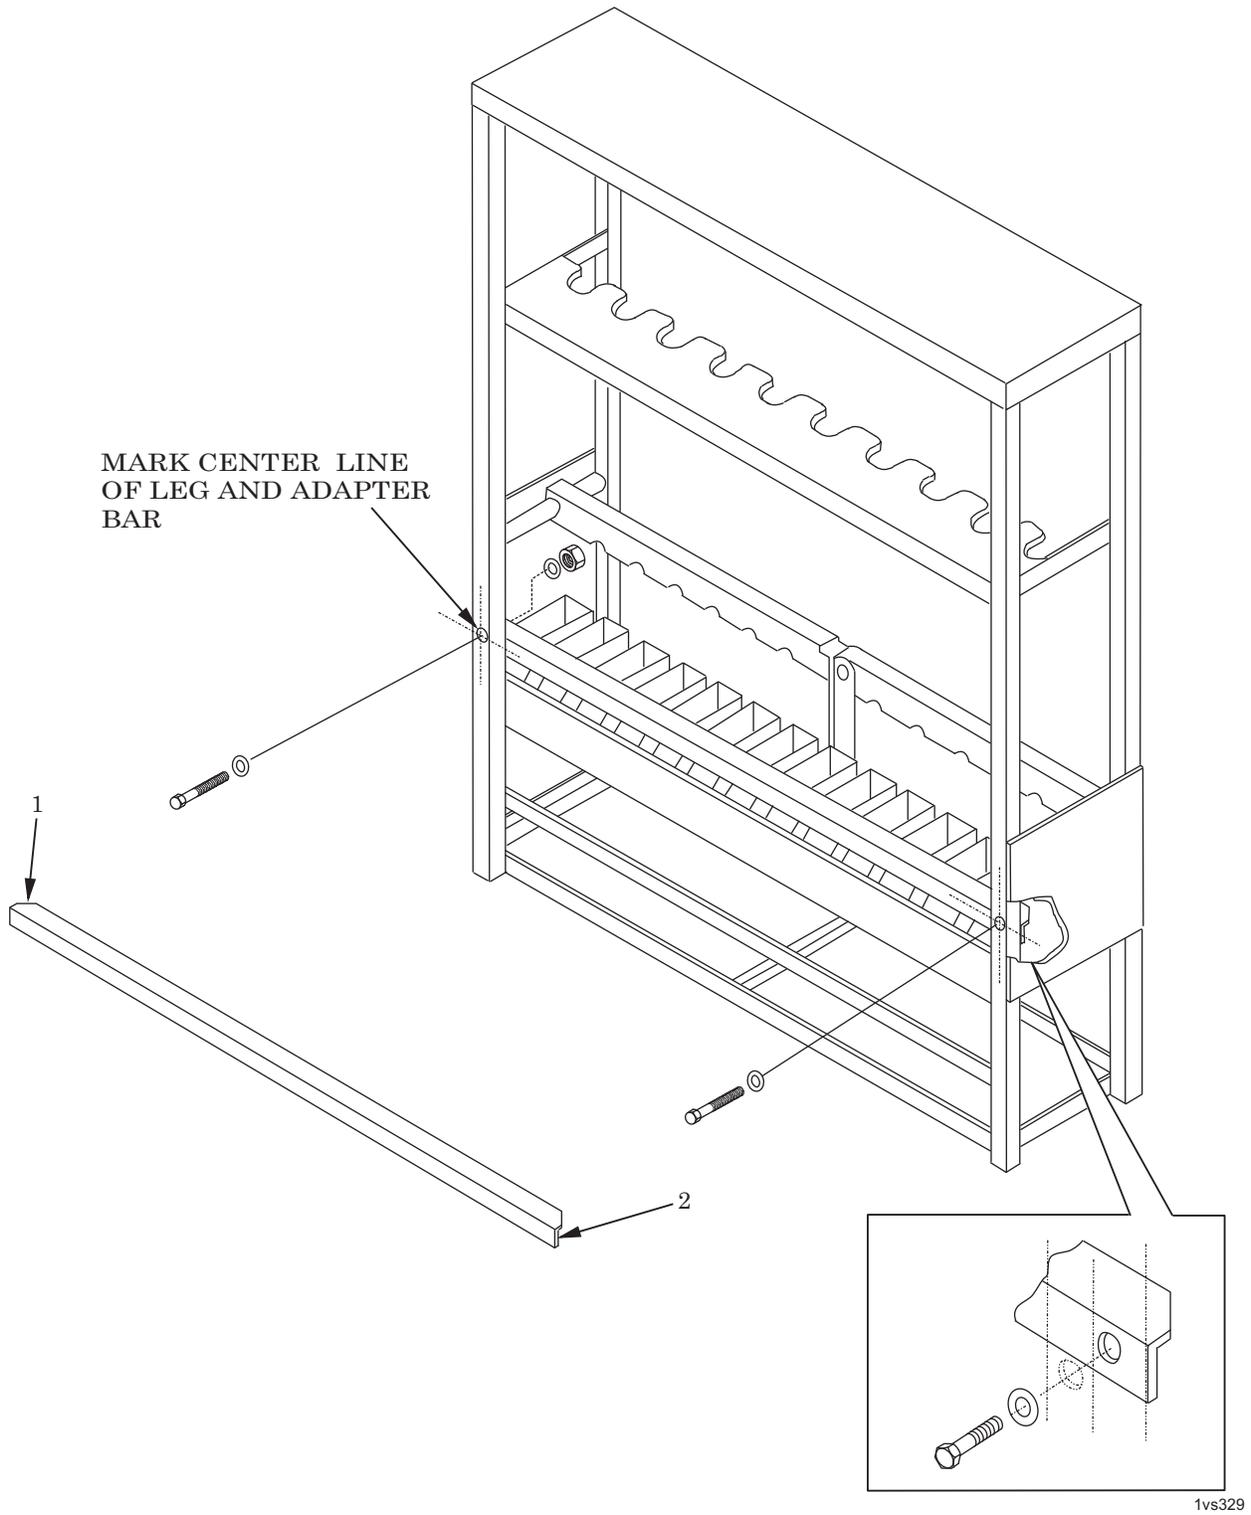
Installing Adapter Bar on M12 Storage Rack.
